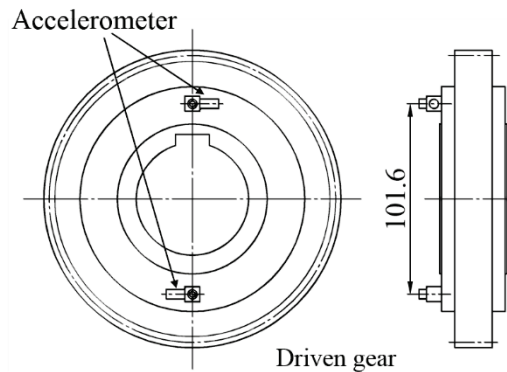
Accelerometer arrangement for measuring torsional vibration
